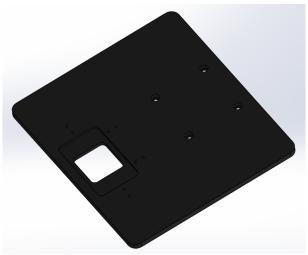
Final version of the stage plate. It has four counterbored mounting holes for attaching the plate to the stage. The viewing window has a recessed lip to allow for custom inserts. There is a total of eight threaded holes around the viewing window. These attach the microscope sample clips. In the CAD image it is shown as anodized aluminum, but we were unable to complete the plate coating four our verification prototype.
